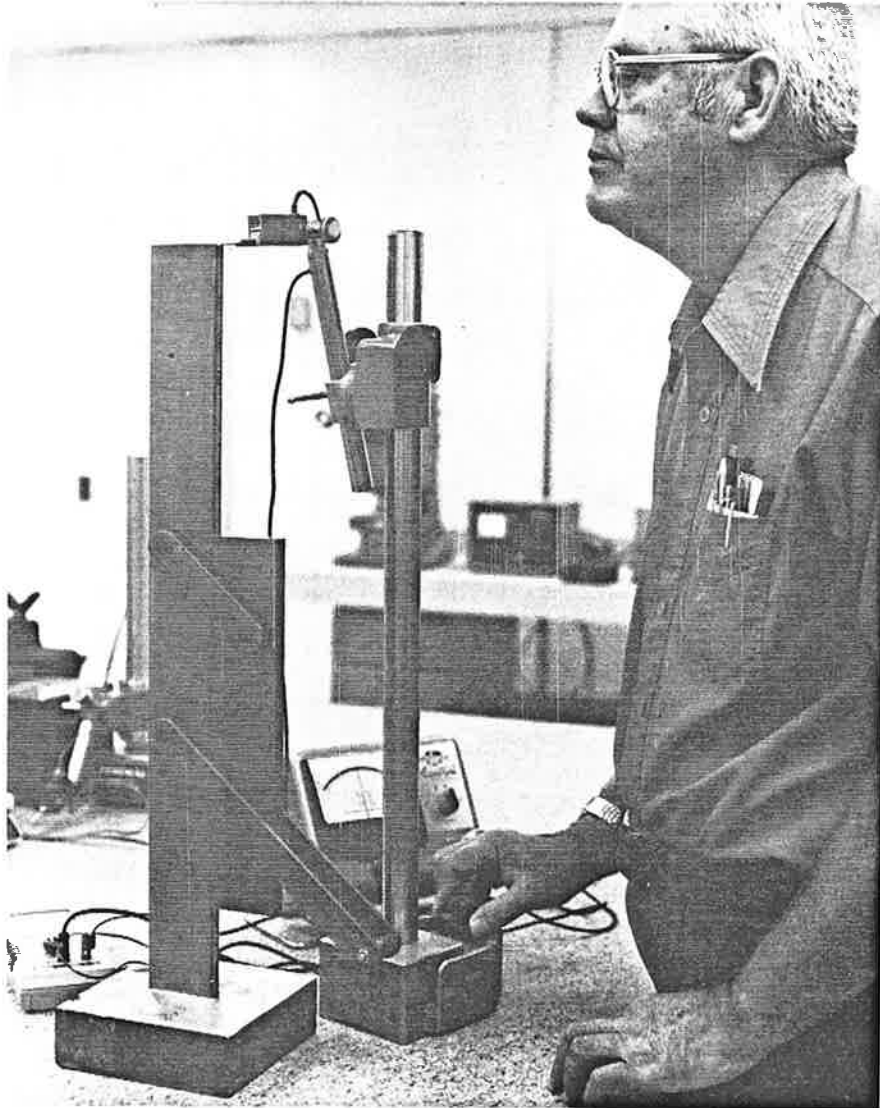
MEASUREMENT OF FINAL MEIER ROD LENGTH IN HOLDING FIXTURE
